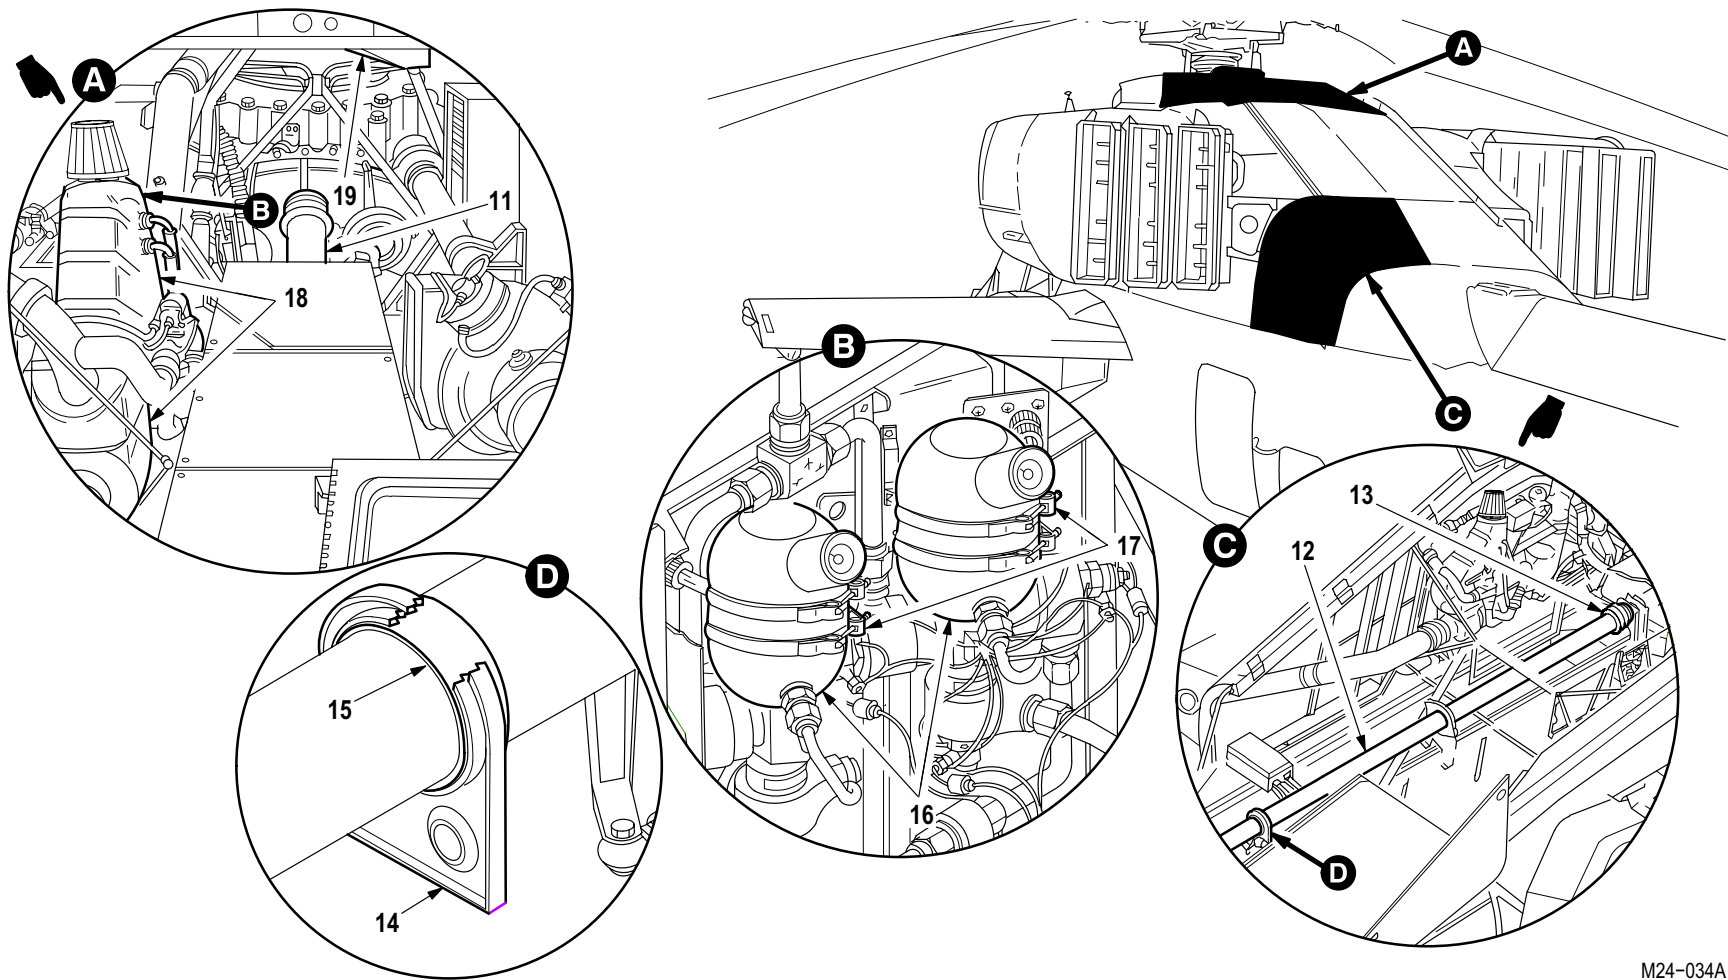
Inspection Area No. 7 (Sheet 1 of 3)
